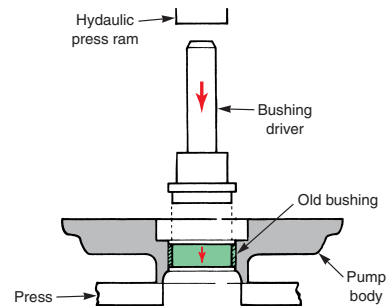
Worn pump bushings can be replaced with new bushings. The old bushing is pressed out, as shown here. Always check the service manual for exact specifications and use the proper bushing removal and installation tools. (Ford)
